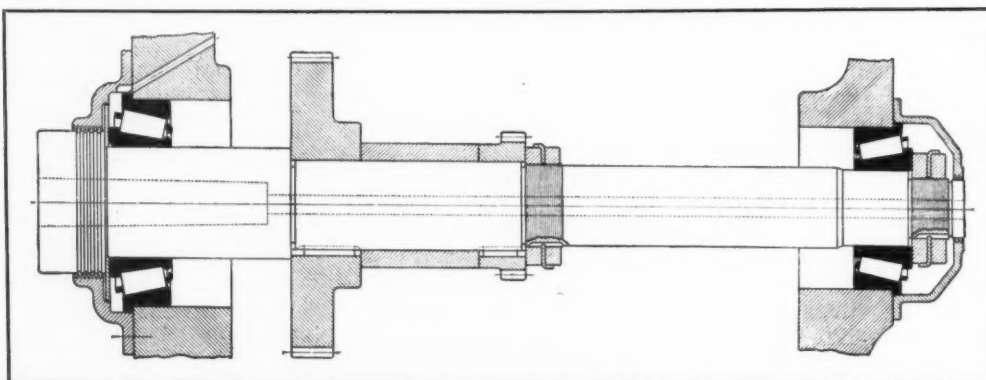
Mounting for Milling Machine Spindle with Flanged Type Bearings
